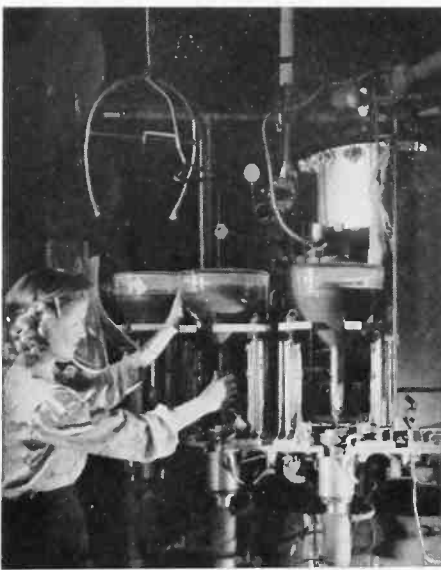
Loading a tube on the exhaust machine. The bulb on the right is just about to enter the oven.
